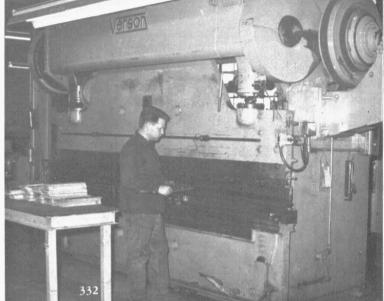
Assembling poultry packaging machines. Fig. 332—Massive machines are used to shape the stainless steel used in poultry equipment.
